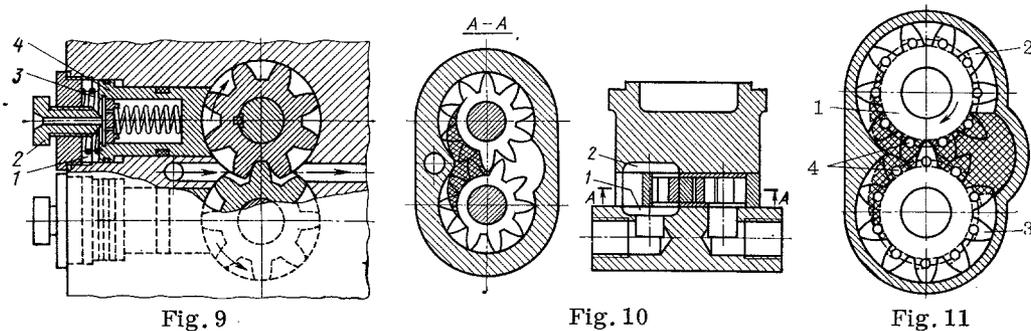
Mechanism for radial clearance compensation in a gear pump.
